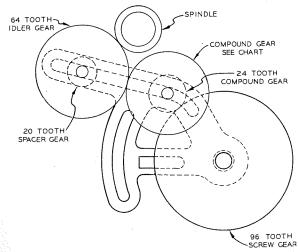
Gear set-up for 40, 44 and 56 threads per inch.
